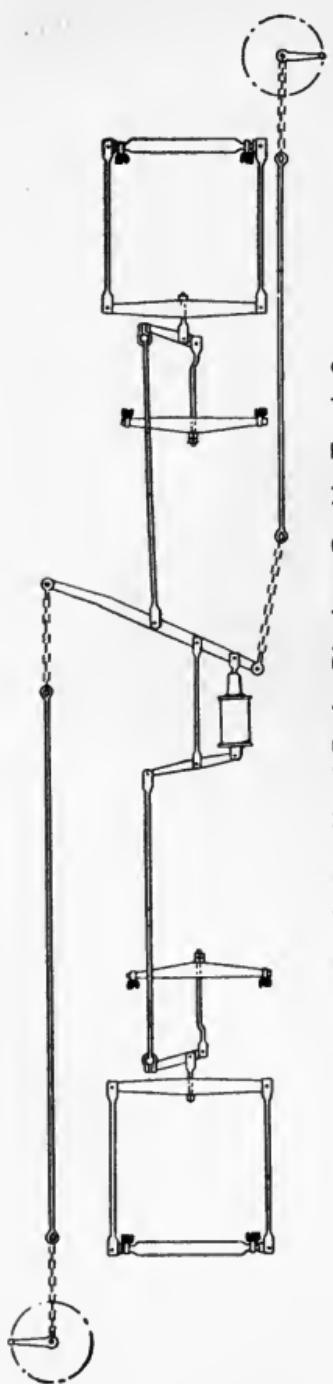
Air and Hand Brake Rigging—Double-Truck Car.
